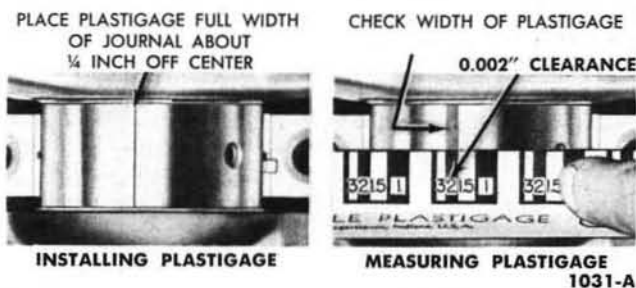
Installing and Measuring Plastigage—Engine on Work Stand
